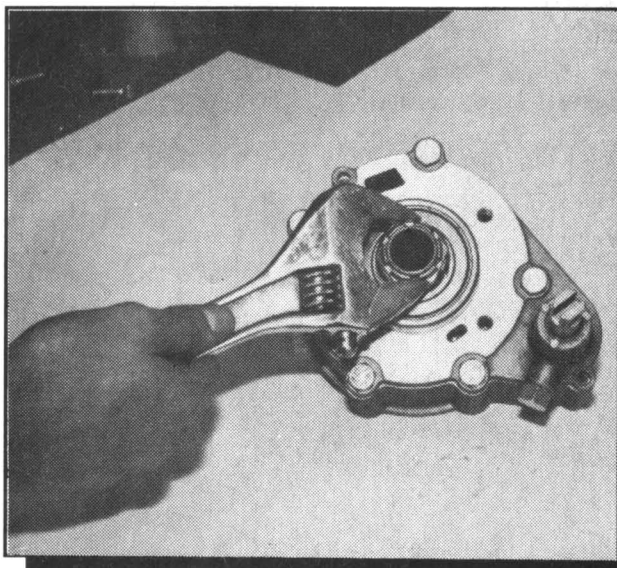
Remove the spline shaft nut. The shift fork must be at the rear of the case, locking the unit in the overdrive position before the nut can be removed.
